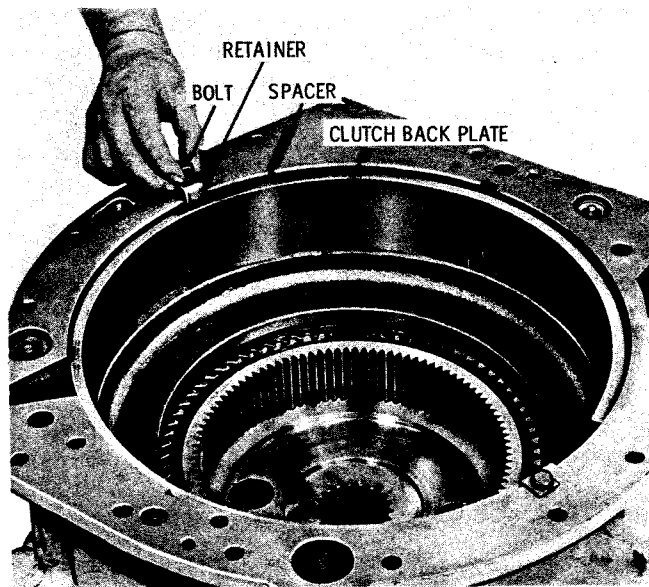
Removing high-splitter clutch back plate spacer retainers
